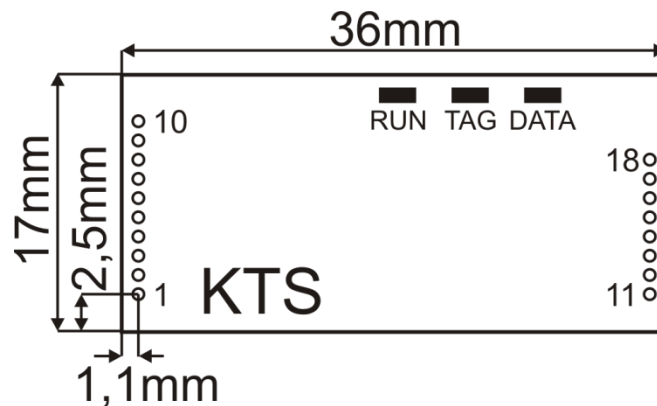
mechanical sketch - NOT technical drawing (for precise dimension please contact)
